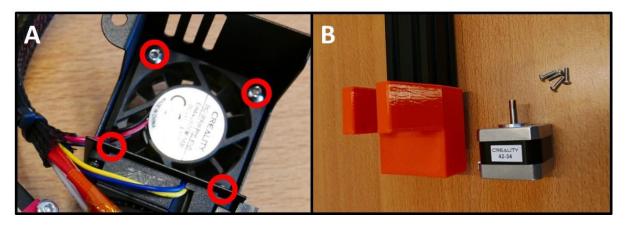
The stepper motor will be mounted with M3x10 screws. A) Take the M3x10 screws from the fan mounted on the extruder head. B) Ready to install the stepper motor.
